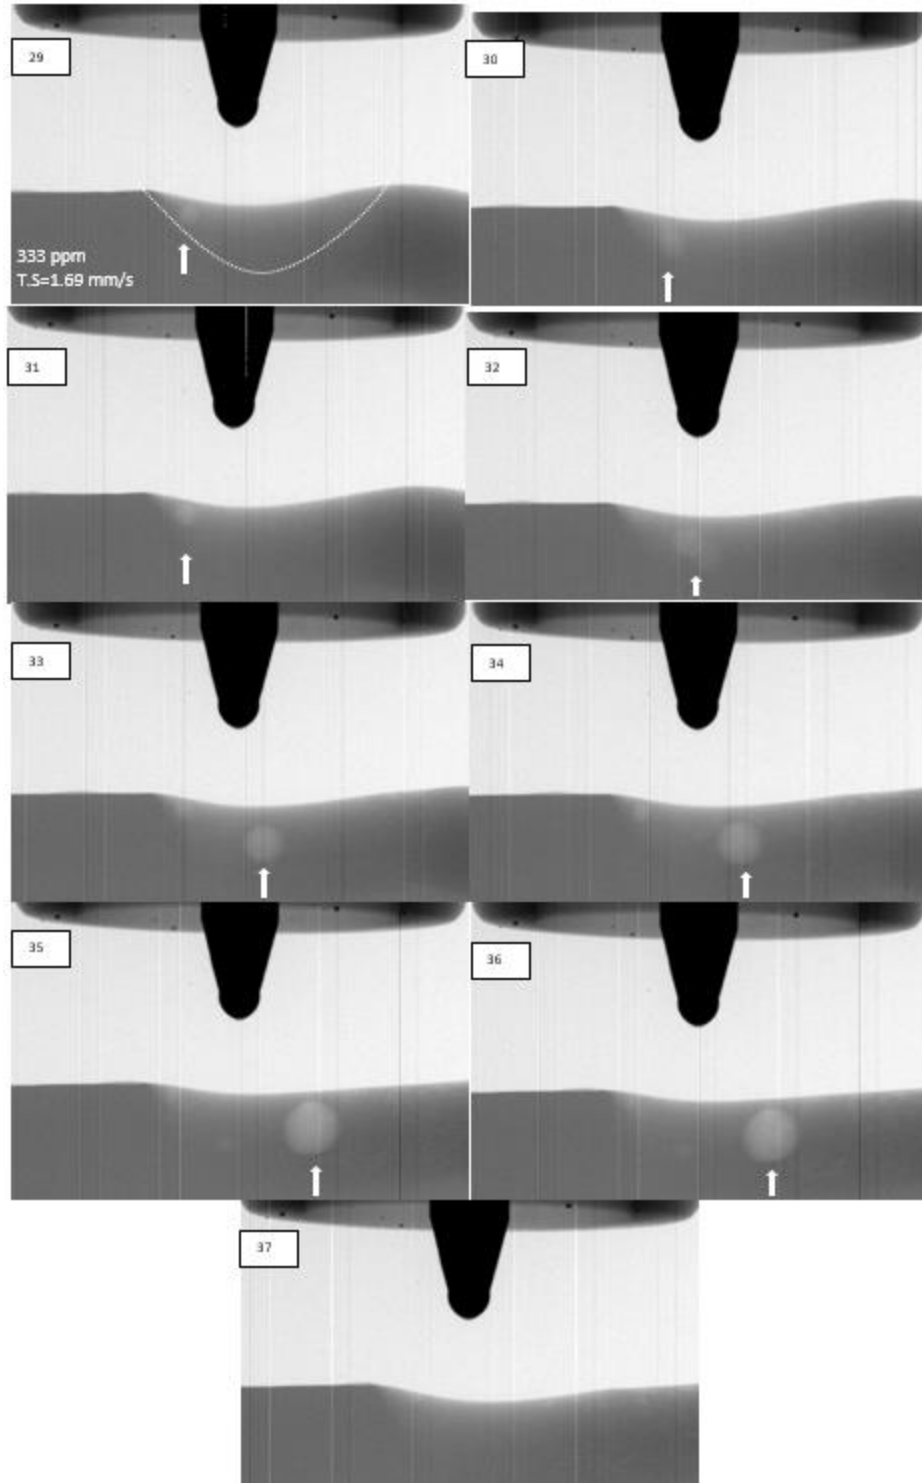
Alloy 6061 welded using 333 ppm of shielding gas hydrogen at 1.69 mm/s.
